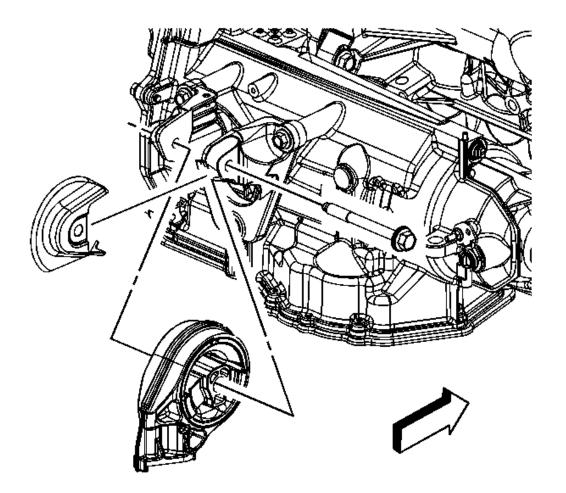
Engine Mount Bolts Courtesy of GENERAL MOTORS CORP.
